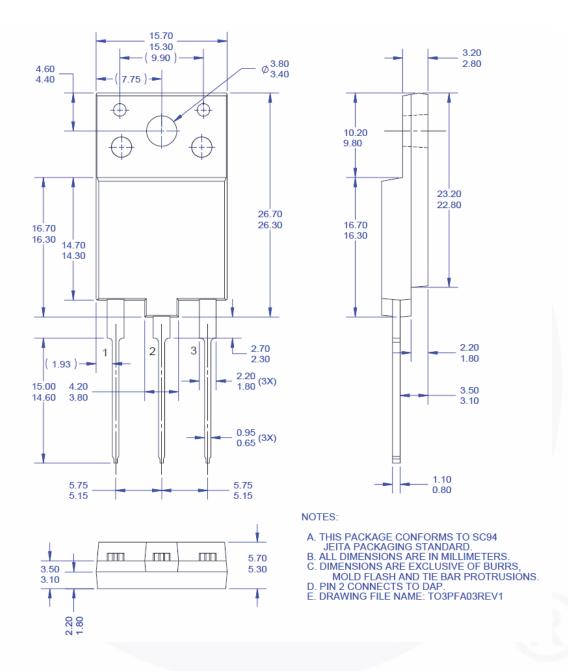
TO3PF, Molded, 3-Lead, Full Pack (AG)
